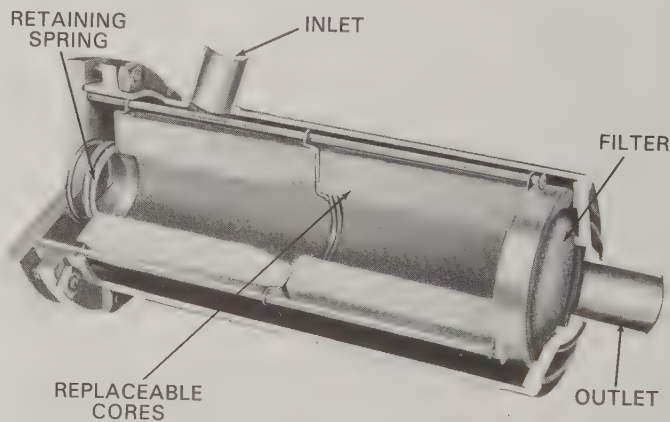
Desiccant granules can be molded into a core for the receiver-drier, as shown in this cutaway view. (Sporlan Valve Co.)
